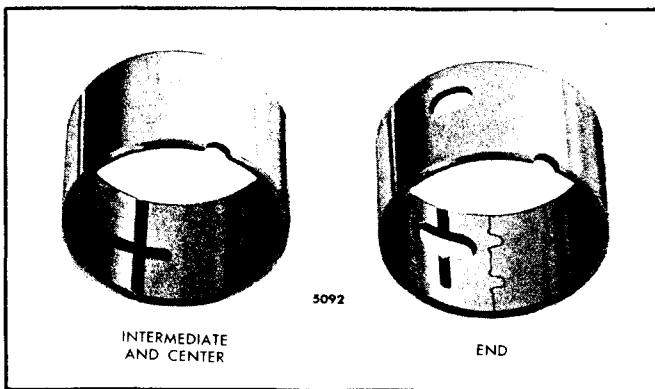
Camshaft and Balance Shaft Bearing Identification
